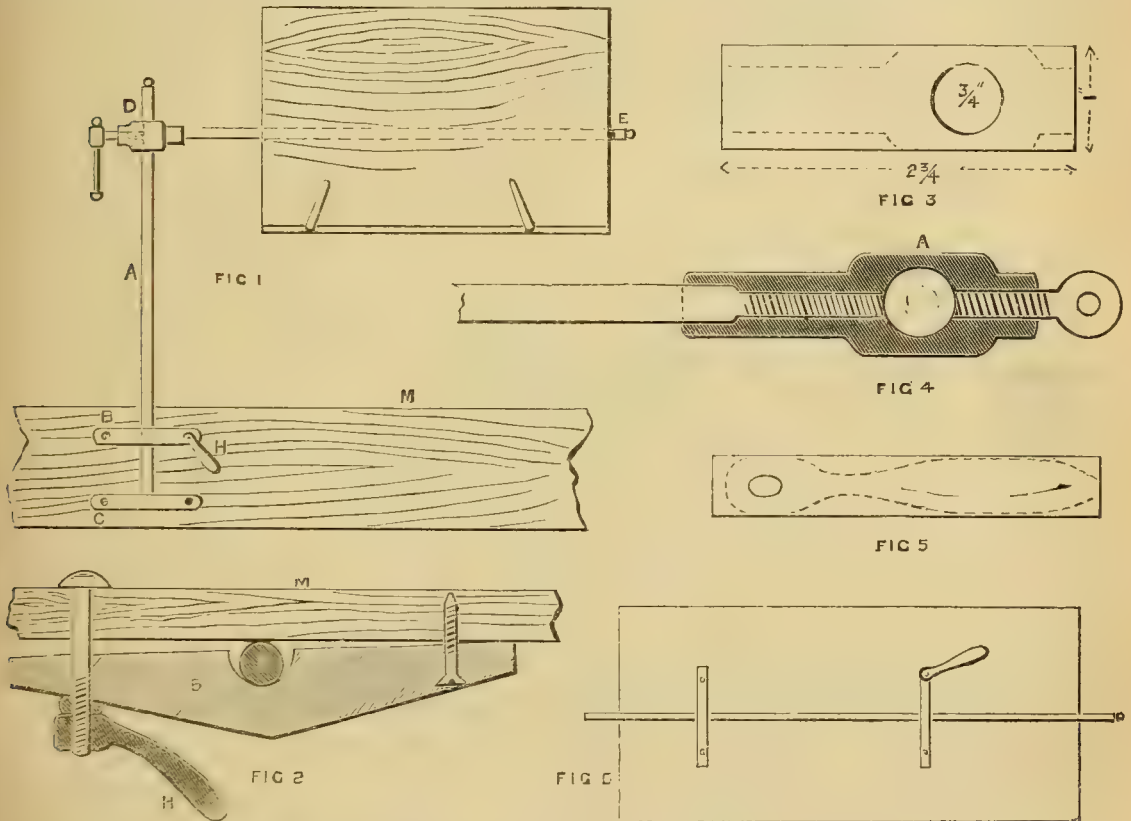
ENTIRE STAND, SHOWING PILLAR, ARM, AND TABLE. FIG. 2.—CLAMPING ARRANGEMENT FOR PILLAR. FIG. 3.—PLAN OF PIECE D, MADE OF 1 INCH SQUARE IRON. FIG. 4.—PIECE D, ARM, AND SET SCREW. FIG. 5.—DIAGRAM SHOWING HOW HANDLES ARE TURNED OUT OF SQUARE IRON. FIG. 6.—BACK OF TABLE SHOWING MEANS OF CLAMPING BY HANDLE.
